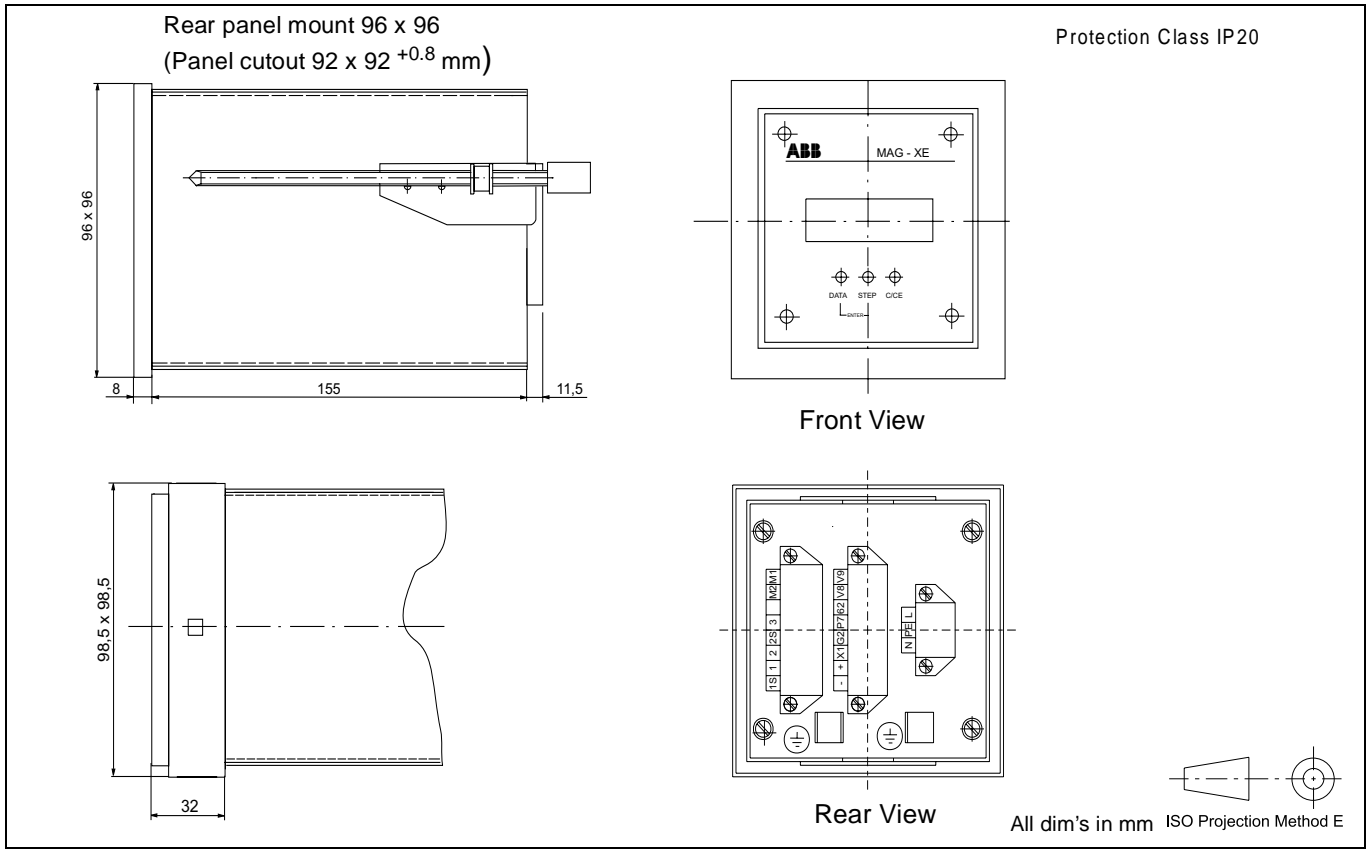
Dimensions, Converter E4 in Rear Panel Mount Housing for Operation with Flowmeter Primary Models DE46, DE26
